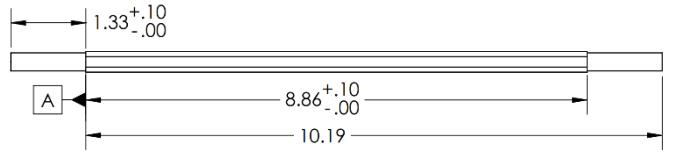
Idler roller rod manufacturing drawing, rendered in SolidWorks, with dimensions in inches.
